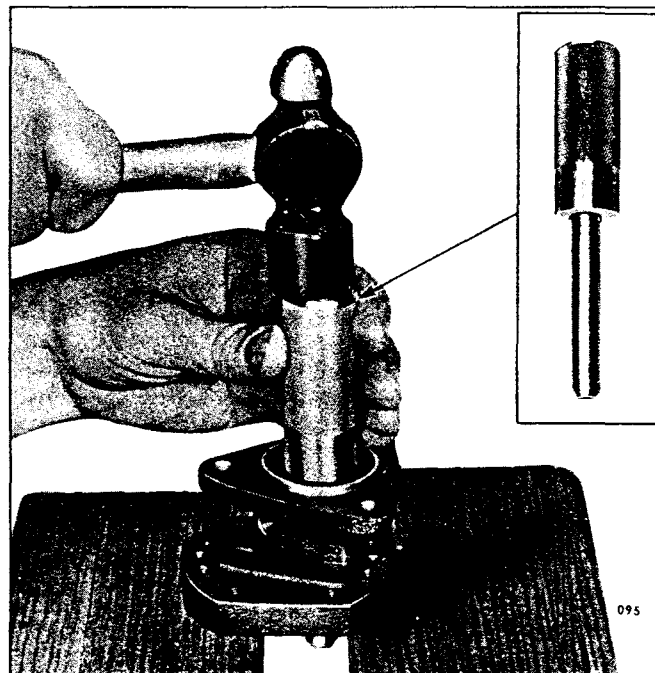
Installing Inner Oil Seal Using Tool J 1508-8
